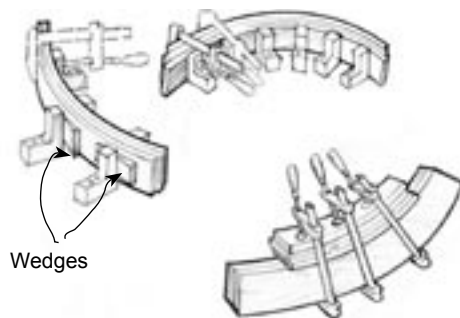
Transfer the desired stringer profile to a laminating jig.
